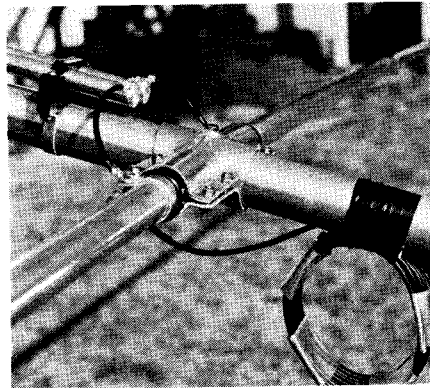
Details of the beta match, driven element and coaxial rf decoupling choke after assembly of the beam was completed. Plastic inserts insulate the halves of the driven element from the boom. The beta match provides a dc return for lightning protection.
